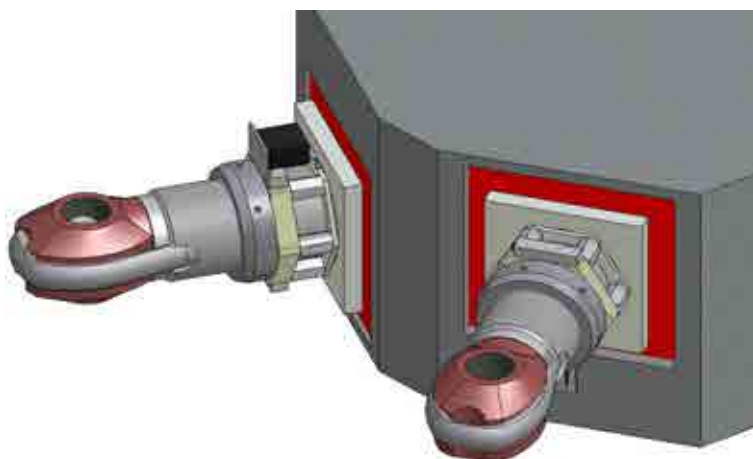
Force sensors HB005, installed at prestressed concrete strands.
